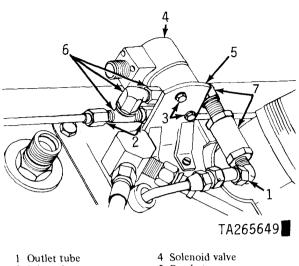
Removing or installing manifold heater fuel inlet solenoid valve or fuel filter/filter element.
